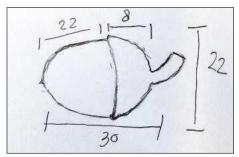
Rough drawing to show approximate dimensions of the acorn pendant
